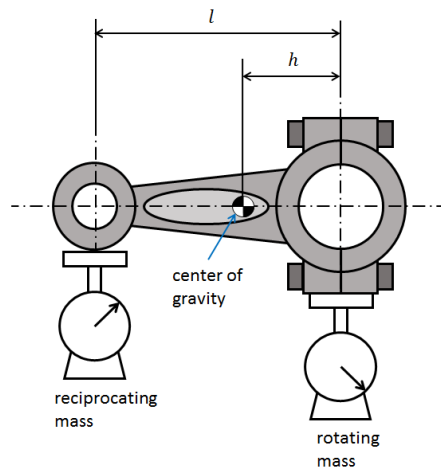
Dividing the mass of the connecting rod into reciprocating and rotating parts.
